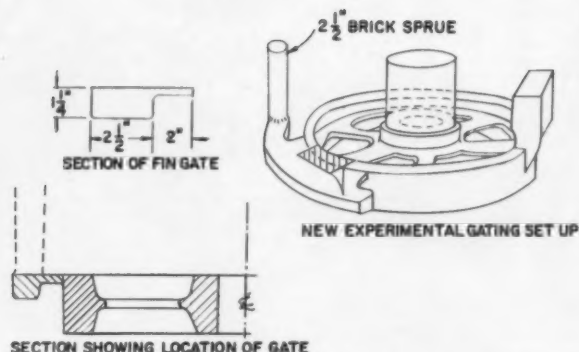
Fin gating used to produce gear blank which passed complete magnetic particle inspection with highly satisfactory results.
